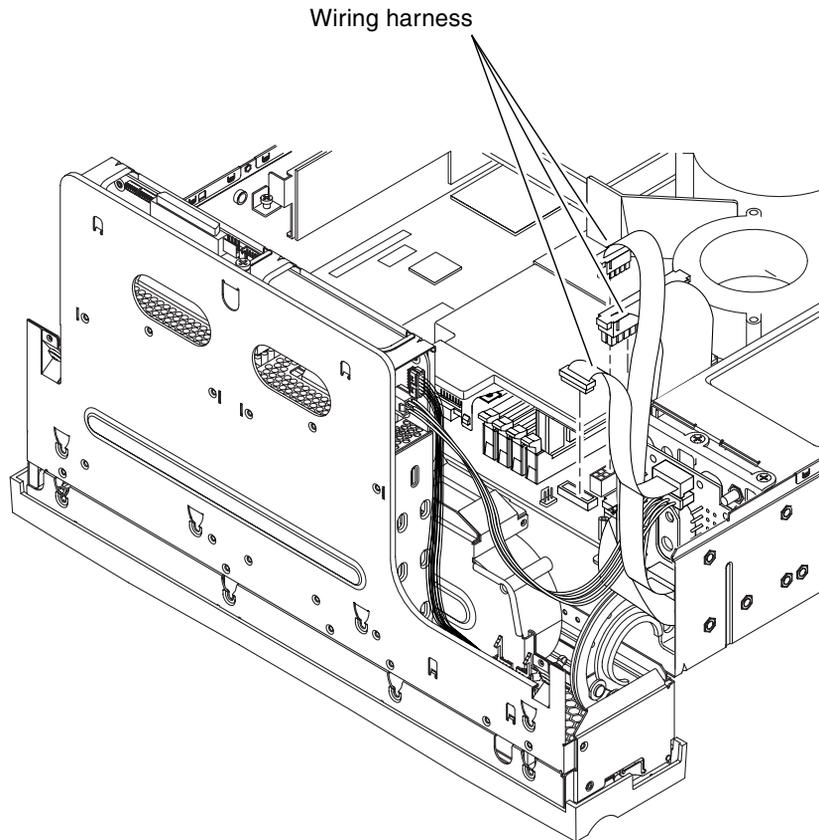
Disconnecting the PDB Wiring Harness From the System Board
